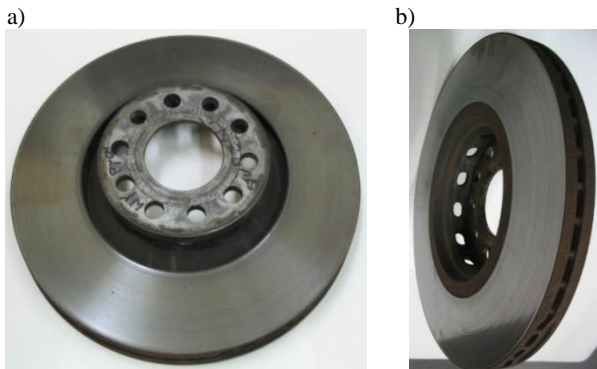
Brake disc with proper exploitation wear: a) external side, b) internal side
